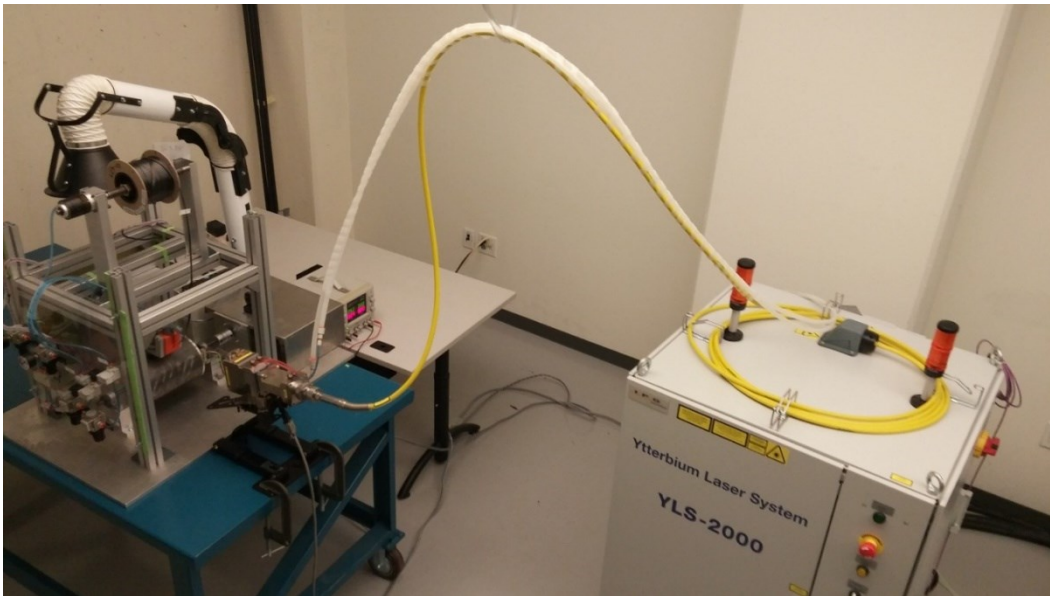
YLS2000 Laser System Plugged to D50 Welding Head
